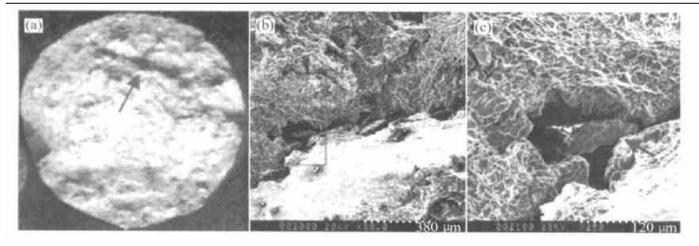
Fracture surfaces of fresh A356 tensile tested sample without filtration
